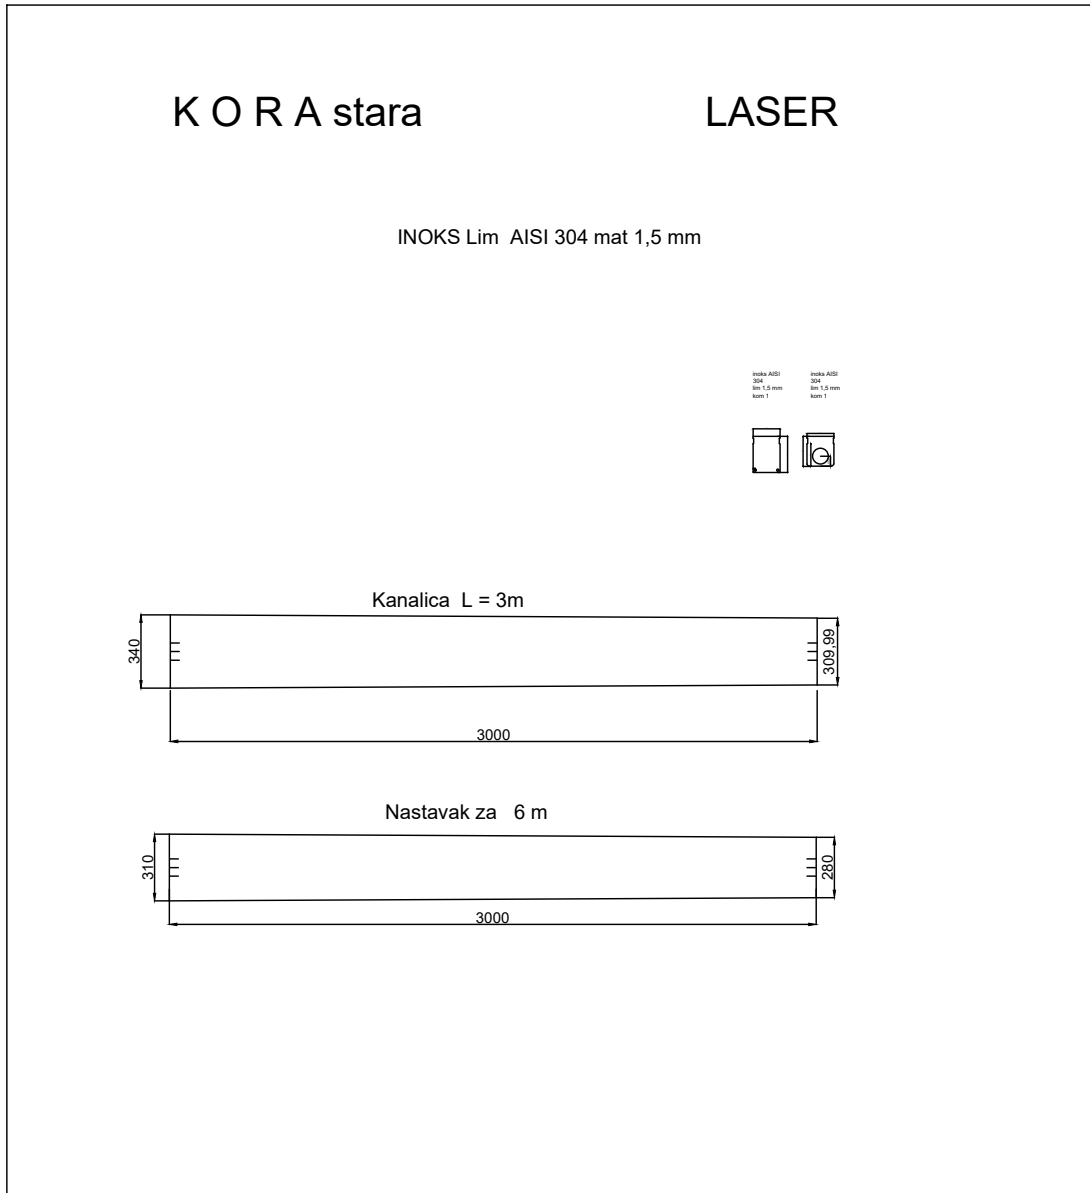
Laser drawing for KORA (Source: Own drawing)
